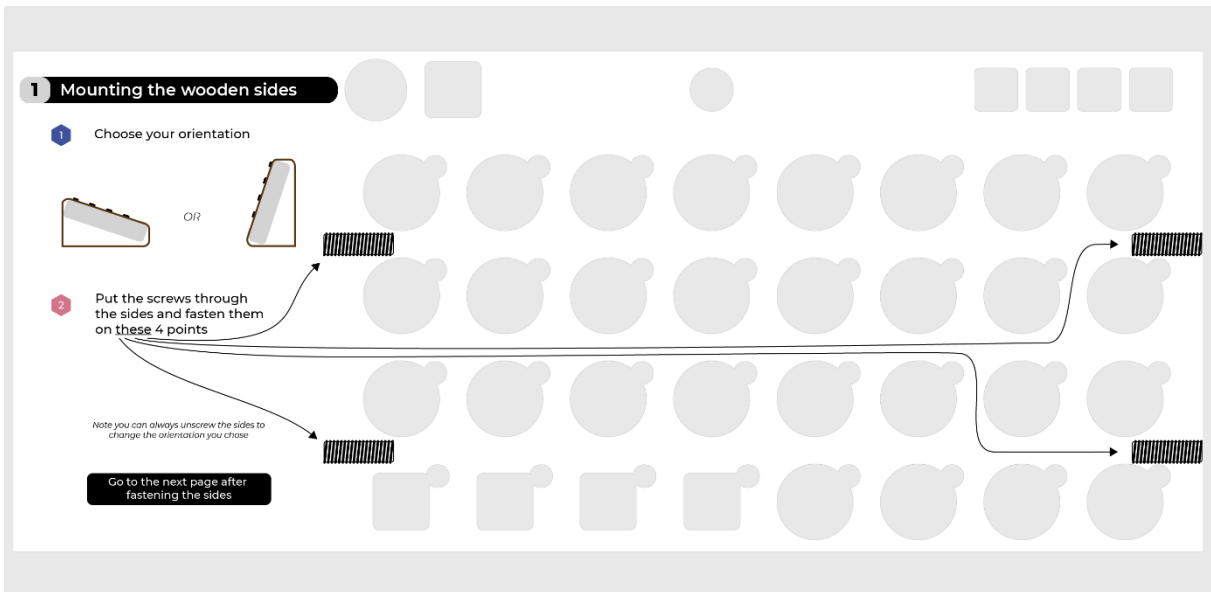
Final design of the first paper overlay, explaining how to mount the wooden sides
